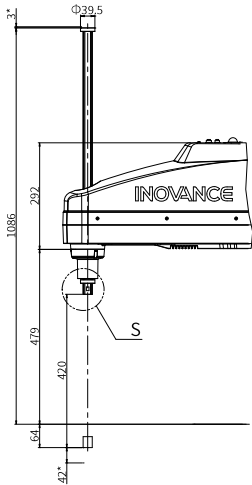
Upper and lower limit position dimensions for axis J3 of IR-S20 (unit: mm)
